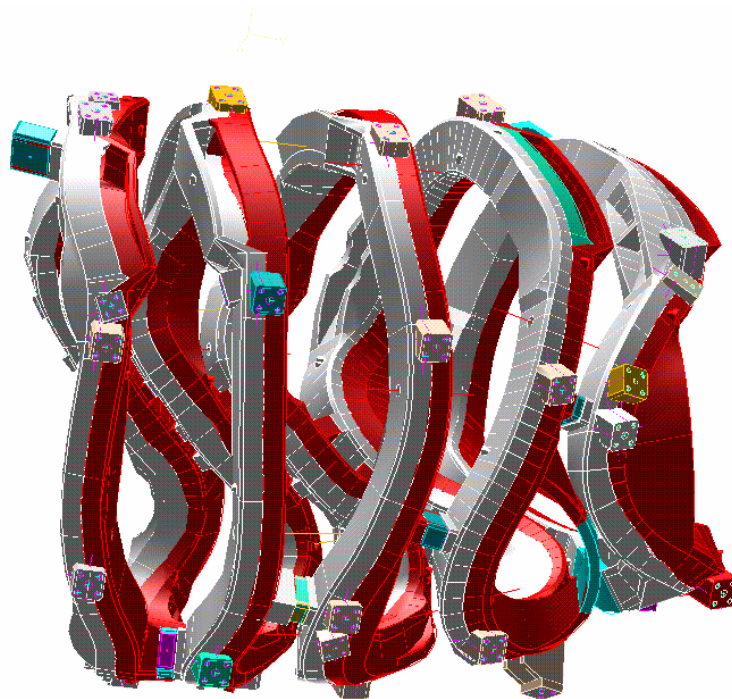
We need 4 lateral supports per half-module. This are also welding joints.
